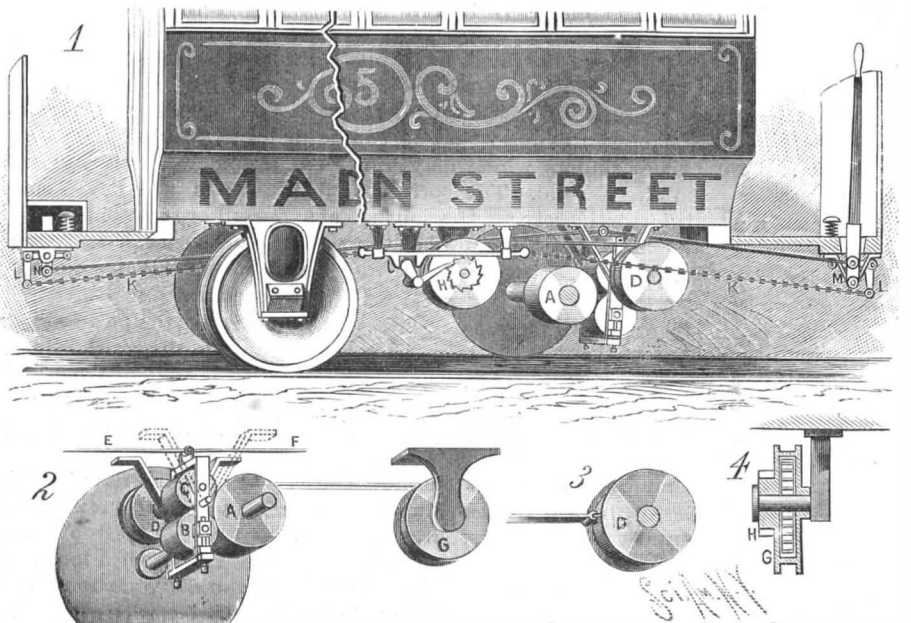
is a perspective view, partly in section, Fig. 2 is a detail perspective view of principal parts of the mechanism, Fig. 3 shows the connection of the spring tension band with the barrel on one of the friction wheel shafts, and Fig. 4 is a vertical sectional elevation of the starter spring, with its barrel or case and attached ratchet wheel. To the axle of the wheels there is fixed a friction drum, A, against which friction wheels, B C, fitted in a frame, are adapted to act, this frame being so pivoted that either of the wheels may be brought into contact with the drum. On the shaft of the friction wheel, C, there is fixed a barrel, D, to which is connected one end of a band or belt, the other end being secured to the periphery of a case or barrel, G, within which is fitted a coiled spring, the case being journaled on a shaft fixed in a hanger pendent from the car body. One end of this spring is fixed to the shaft, and the other end to the case, to which also is fixed a ratchet wheel, H, with which a dog pivoted in a hanger fixed to the car body is adapted to engage to prevent the unwinding of the spring until the dog is tripped. The connection of the band with the barrel, D, is such as to allow the band to wind in either direction on the barrel. To the top of the pivoted friction wheel frame there are connected two rods, E F, extending to either end of the car, where they are connected with levers, M, whereby the contact of the friction wheels, B C, with the axle drum, A, is controlled. The dog pivoted to a hanger on the car body, and adapted to engage the ratchet wheel, H, on the spring barrel, G, is connected by chains, K, to elbow levers, L, at either end of the car, operated by foot plates attached to the platform.
